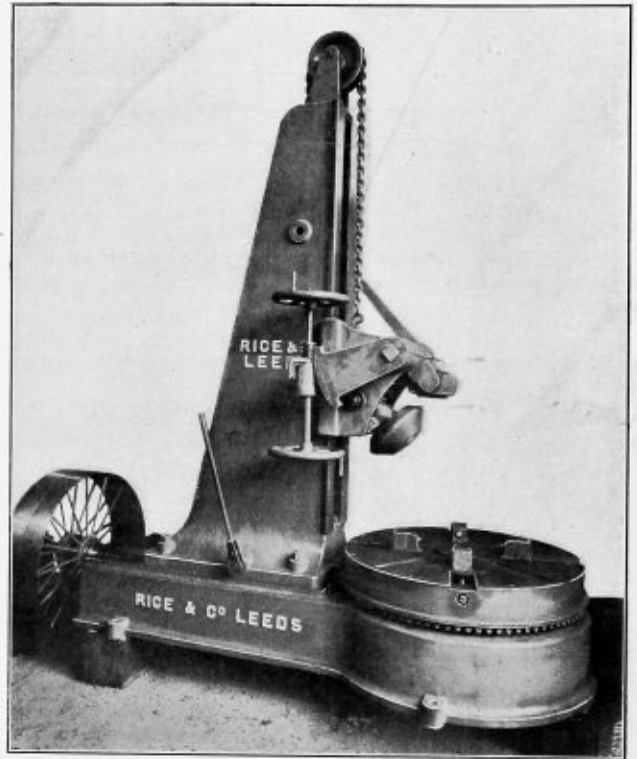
MACHINE FOR FLANGING SECTIONS OF ADAMSON FLUES.
